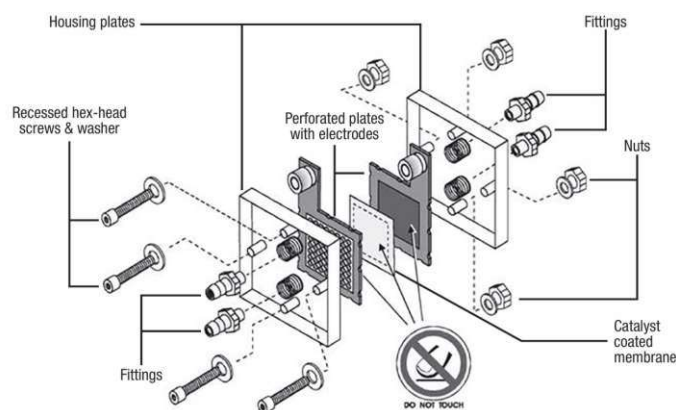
Exploded view from H-TEC EDUCATION's PEM [14]
